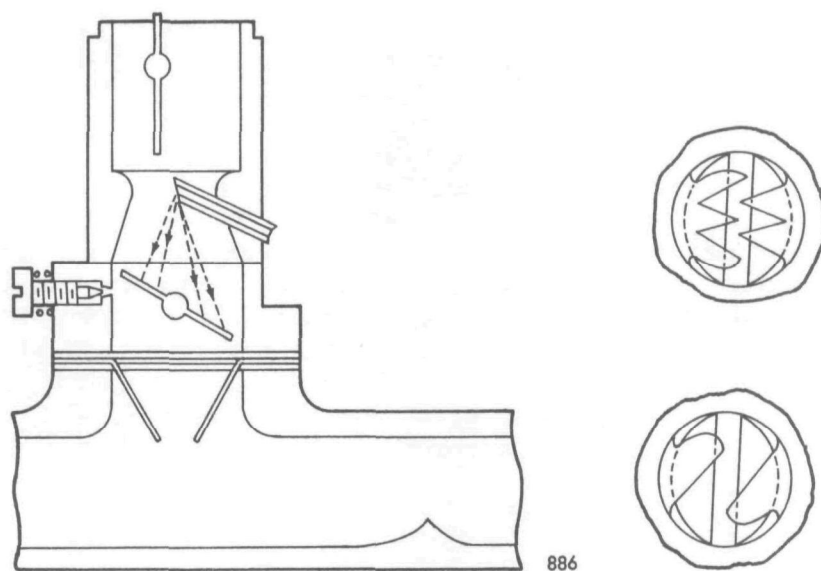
DEVICE 440 INTAKE DEFLECTION PLATE INSTALLED
